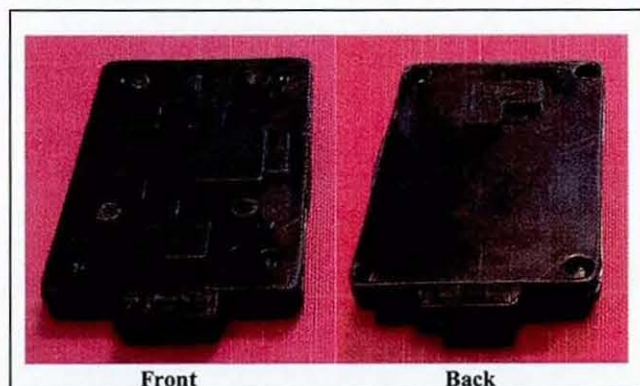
GR-ABS overmoulded sample with in-mould supported topographical tool
